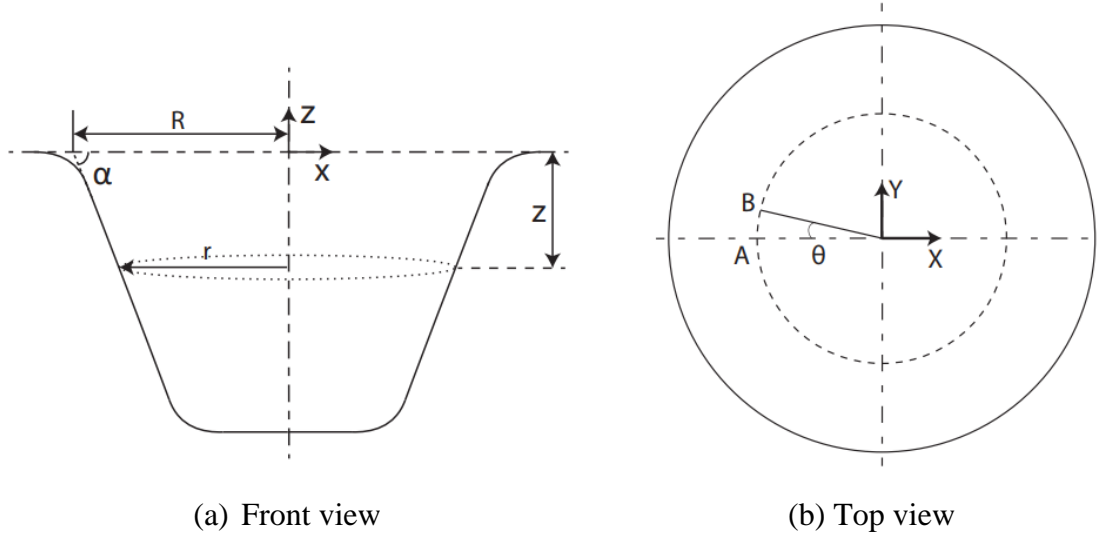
Schematic to generate tool contact points throughout the geometry based on cross sectional points
